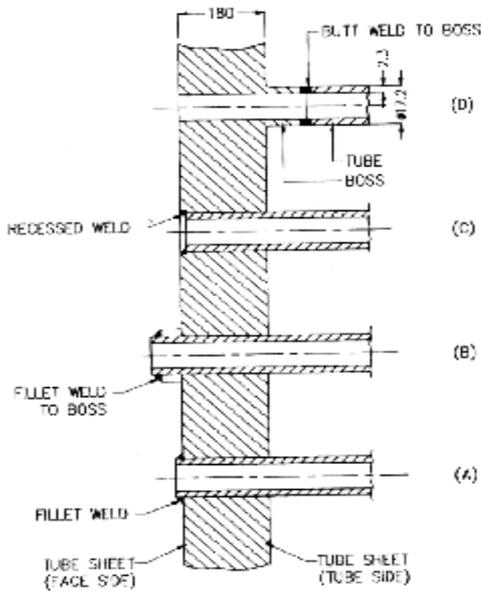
Typical joint configurations of tube to tubesheet welds
